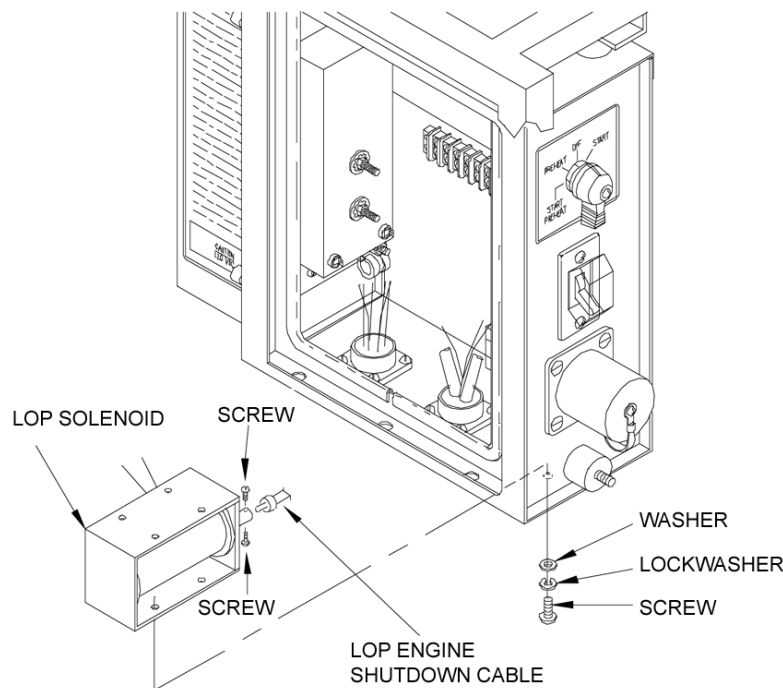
Low Oil Pressure (LOP) Solenoid Assembly.
